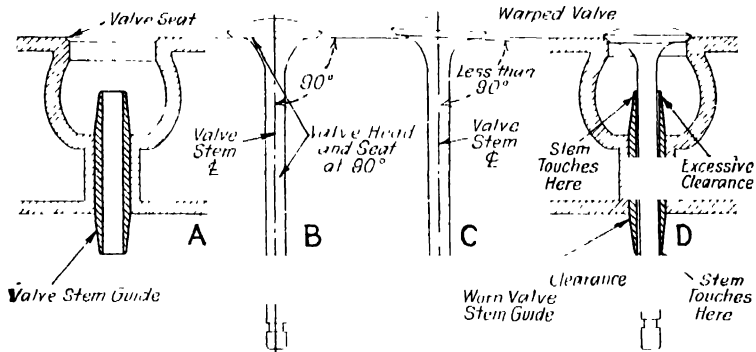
Valve Seat and Guide Relation Shown at A. B Shows Valve Head and Stem in Proper Relation. C Outlines Warped Valve Head. D Shows How Excessive Clearance is Needed in Valve Stem Guide to Allow Misaligned Valve to Seat Itself Completely.
